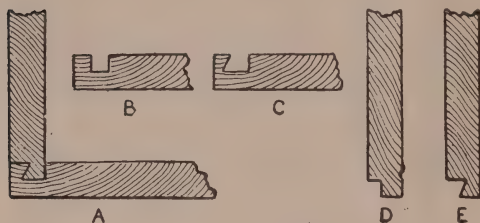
How Dovetail Grooves and Tongues are Cut
